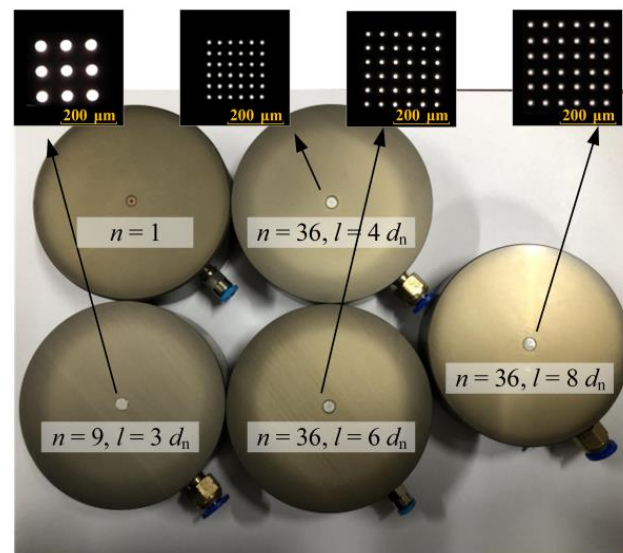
Photo of aerostatic bearings with single-hole and different SMARs.
